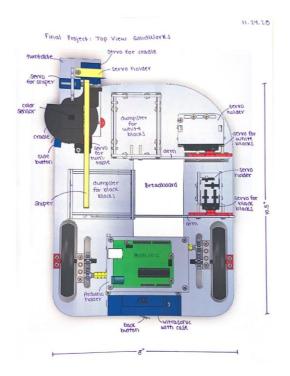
SolidWorks screenshot of Top View of robot for Final Product. This figure shows dimensions and labels to all components.
